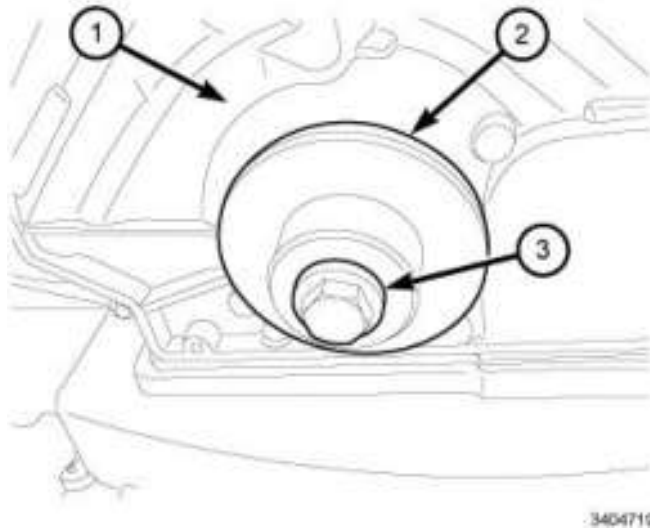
Front Seal Installer Tool & Vibration Damper Bolt
